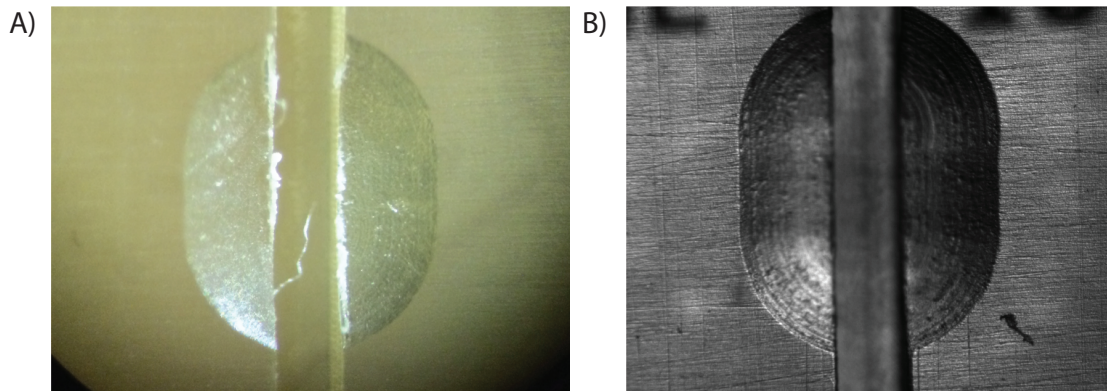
Inspection photos of pump chambers *A)* before and *B)* after cryo-deburring. In this process, the top and bottom plates are dry ice blasted to remove any burrs in the pumps or channels that might damage the membrane or dislodge and plug the scaffold.
